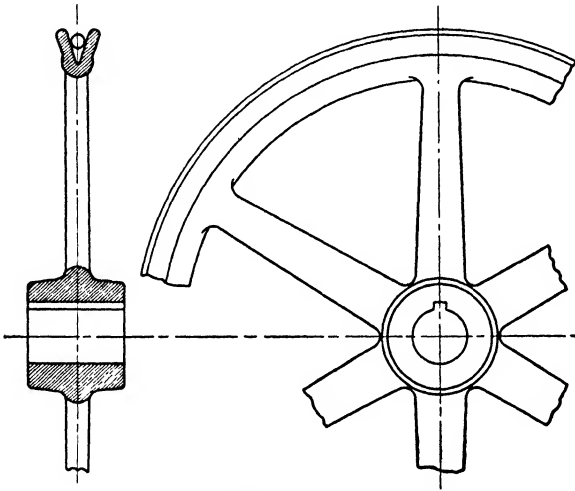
V-Grooved Hoisting Sheave for Light Hand-Power Elevators
